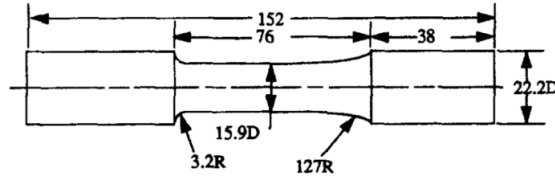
Shoulder fillet geometry investigated by Thompson, starter crack was located at the root of the 3.2 millimeter radius [35][36].
